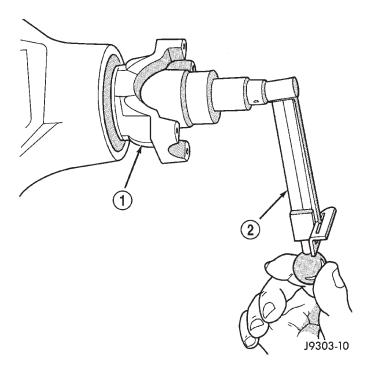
Check Pinion Gear Rotation Torque—Typical
